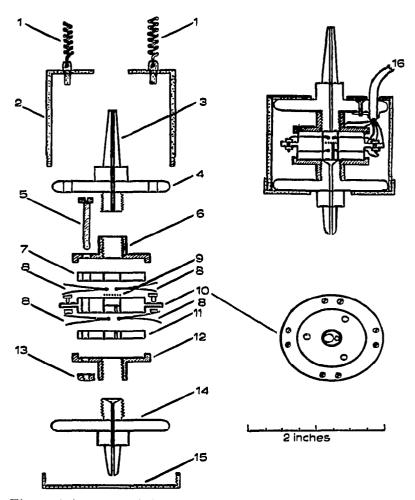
Diagram of the detector. I = Retainer spring. 2 = Aluminium case. 3 = B.5 taper cone. 4 = Fluon end flange. 5 = 6 B.A. bolt. 6 = Stainless steel end plate. 7 = Upper Fluon disc. 8 = Bead thermistor (Fenwal Type No. GB32J1). 9 = Disc of stainless steel mesh. 10 = Flanged central Fluon disc. 11 = Lower Fluon disc. 12 = Stainless steel end plate. 13 = 6 B.A. nut. 14 = Fluon end flange. 15 = Aluminium case screw cap. 16 = Miniature 5 core screened cable.
